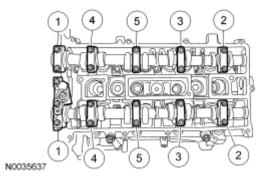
Identifying Loosening Sequence Of Camshaft Bearing Cap Bolts Courtesy of FORD MOTOR CO.
